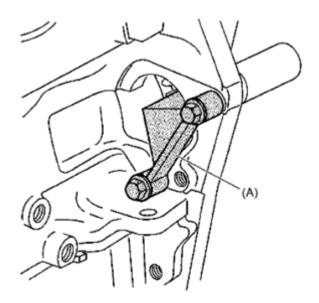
Locking Flywheel With Special Tool Courtesy of SUZUKI OF AMERICA CORP.
